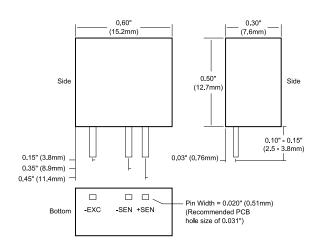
SCMXCJC Physical Dimensions and Pin Layout
